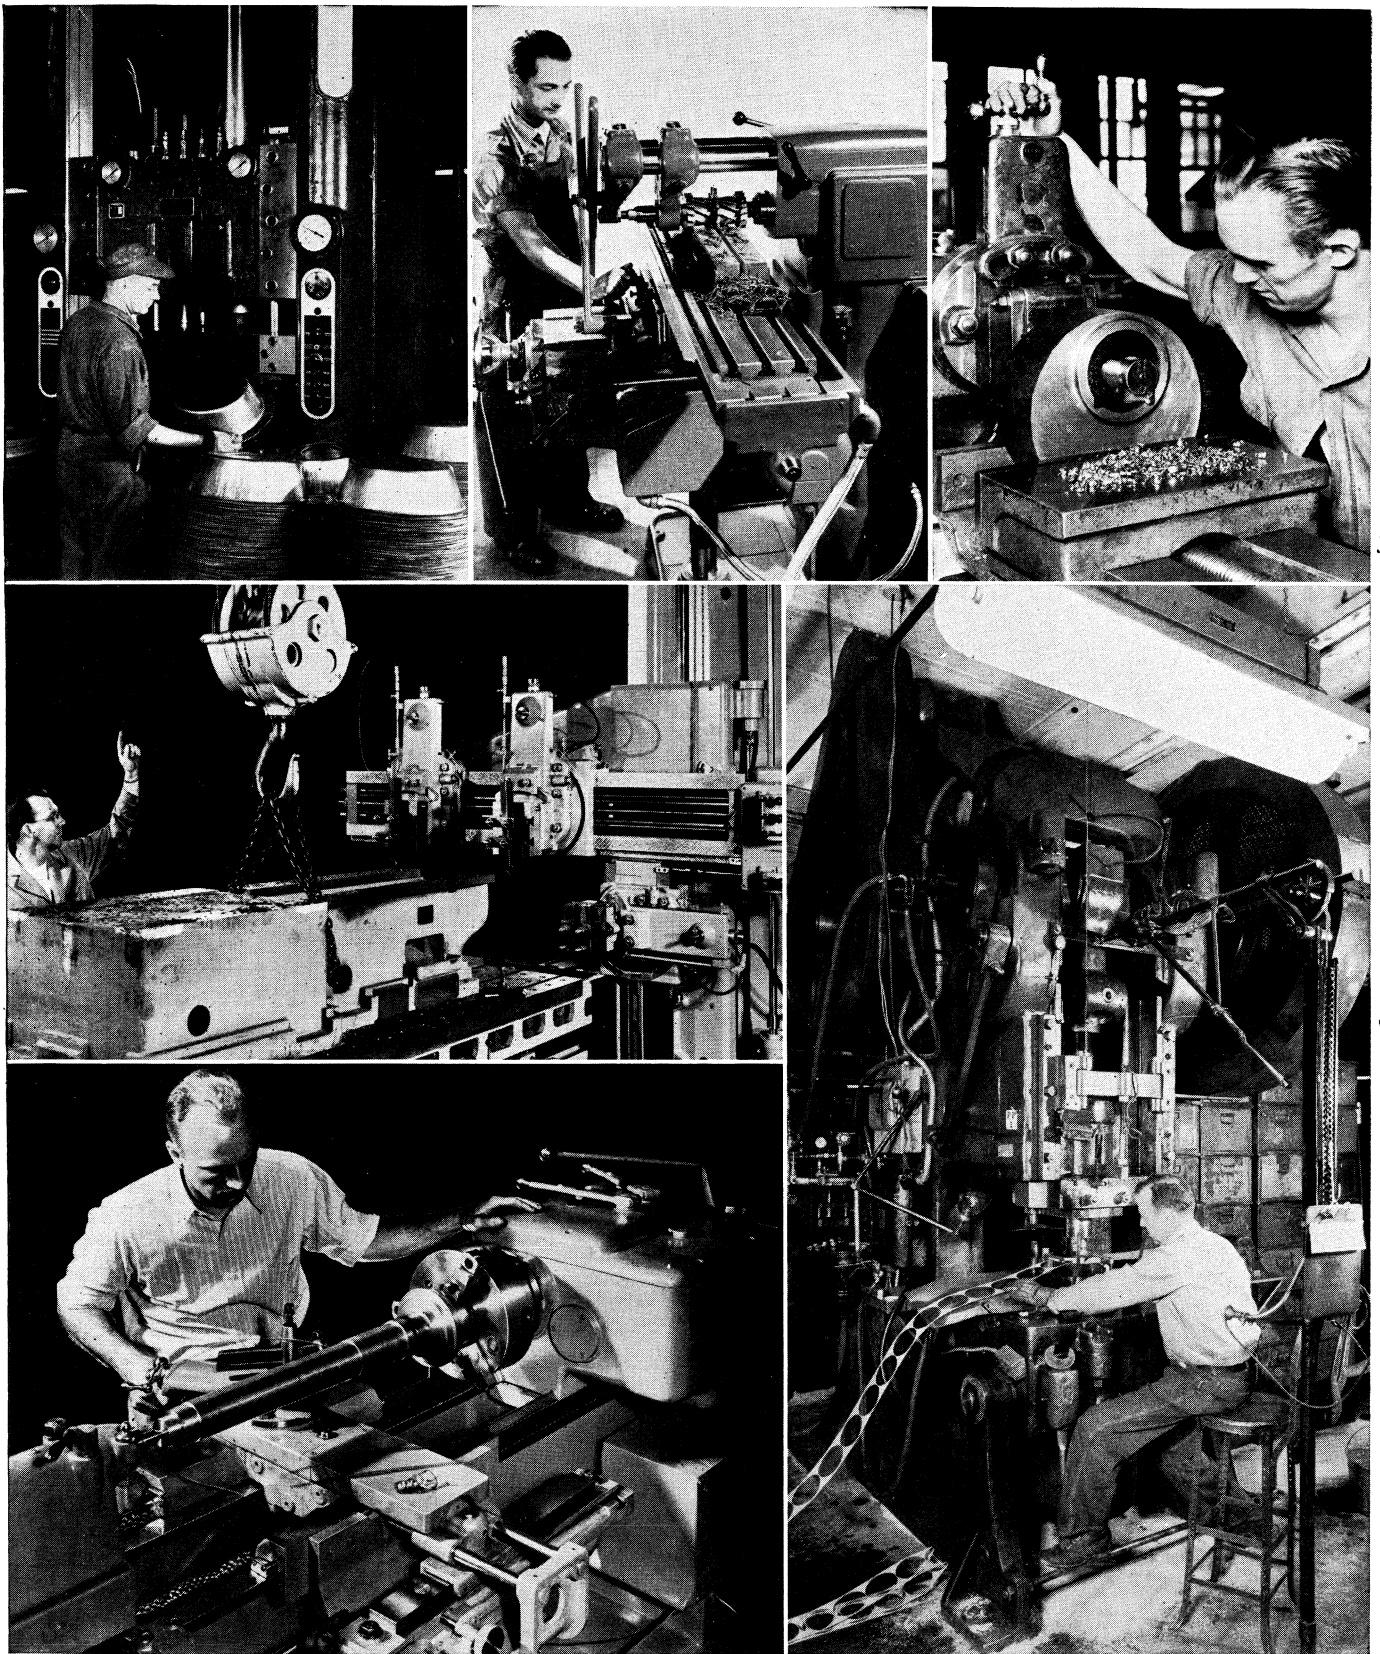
BASIC MACHINE-TOOL OPERATIONS: GRINDING
